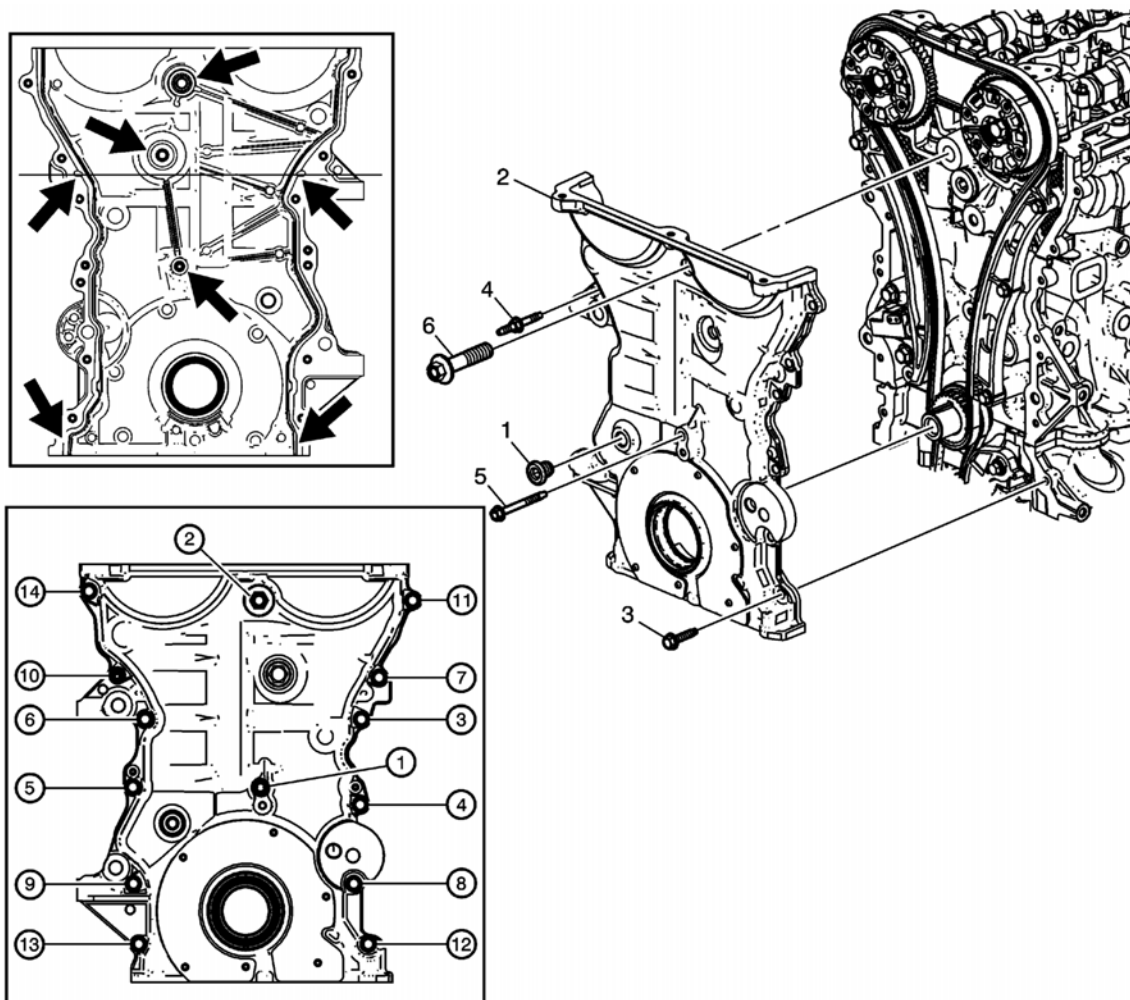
Engine Front Cover and Components With Bolt Tightening Sequence
